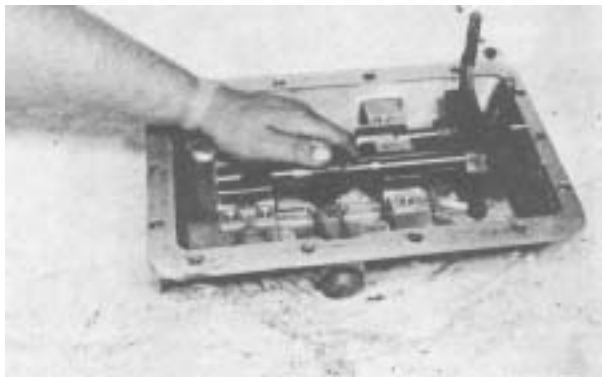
Remove 1st & reverse shift fork, rail and lug assembly.
